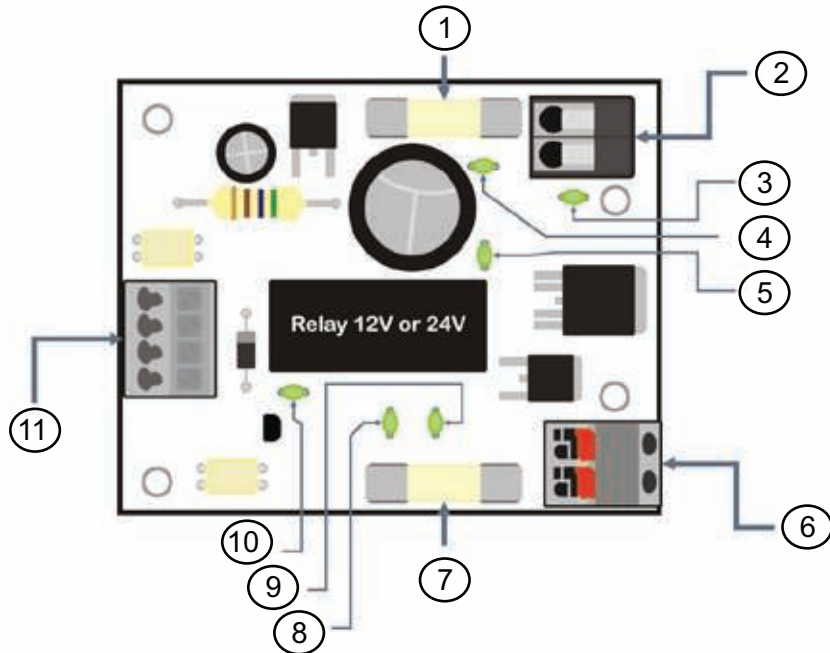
DCMHD PCB Layout showing the locations of major components, terminals, and LED indicators.
